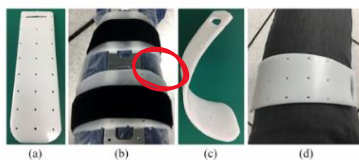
Procedure of customizable braces as the mechanical interface attachment. (a) The unprocessed thermoplastic is machined to form raw part of universal shape. (b) Raw part is heated and applied on user's leg with the mechanical frame. (c) Raw part cools down and forms customized brace. (d) Precise fit with the user's limb.
